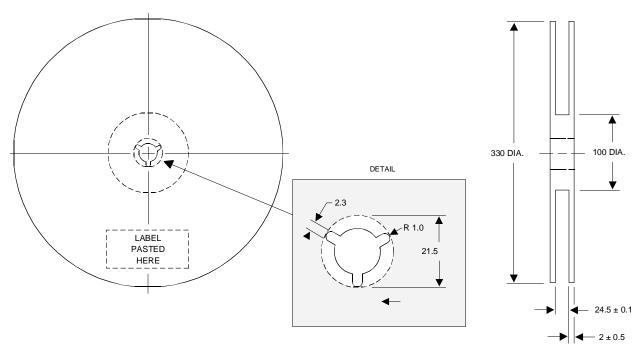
ZHX1010 Reel Dimensions (Unit: mm)
